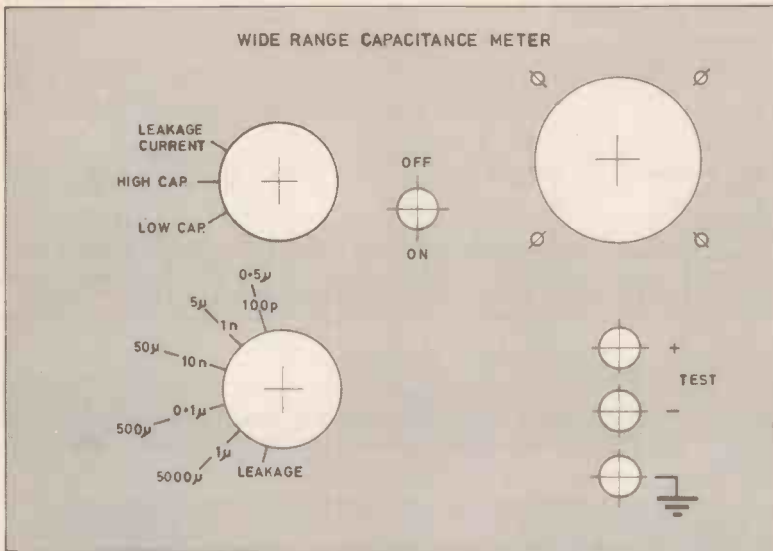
Suggested front panel (half full size) layout and lettering. The drilling sizes will depend on the components used.
